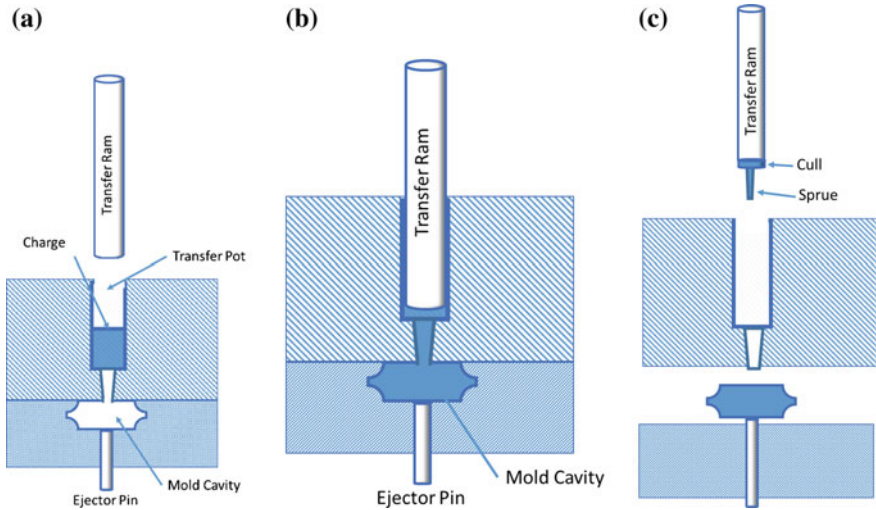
Transfer molding process. a Assembly of transfer molding, b plunger force on the charge to mold cavity through sprue and c removal of finished product by ejector pin
